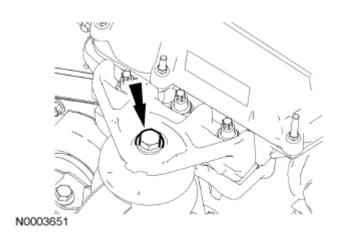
Locating Engine Mount Bracket Bolt Courtesy of FORD MOTOR CO.
